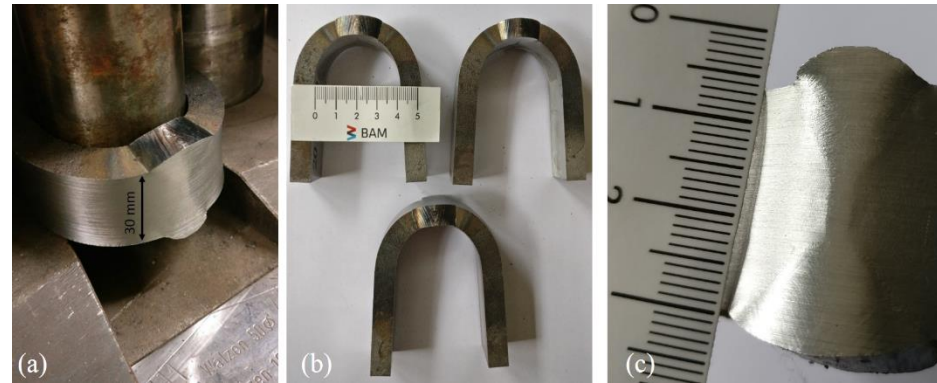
Results of site bend test: (a) bent specimen in the three-point bending machine; (b) top view of bent specimens; (c) convex surface of the bent specimen.
